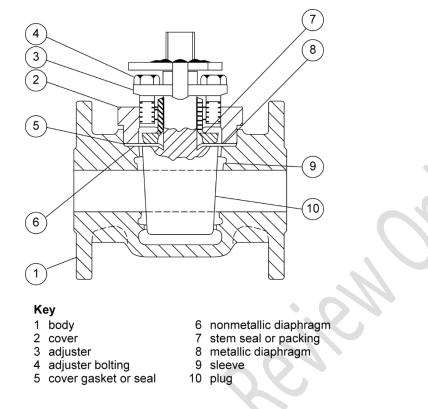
Parts Identification for Nonlubricated Sleeve-lined Plug Valve
